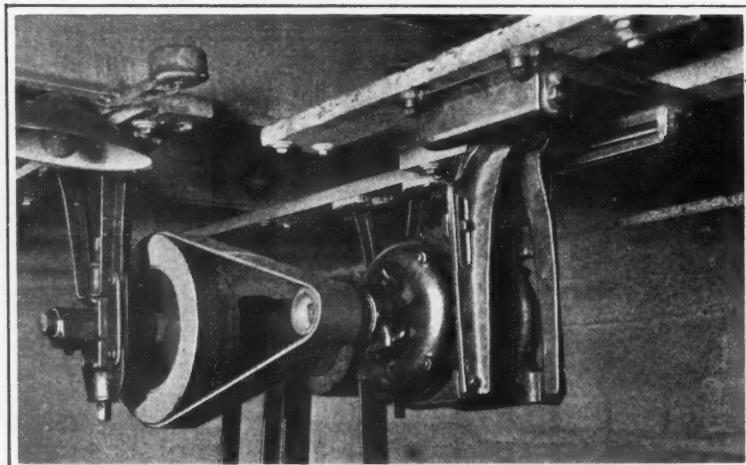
Ceiling Installation of Rockwood Short-center Drive with a Center Distance of 24 Inches
